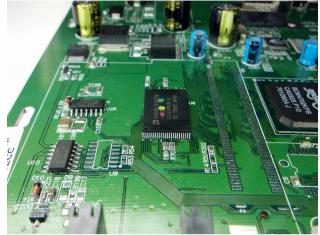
chip is aligned, only pins 1 and 25 are soldered during the first part of this step
